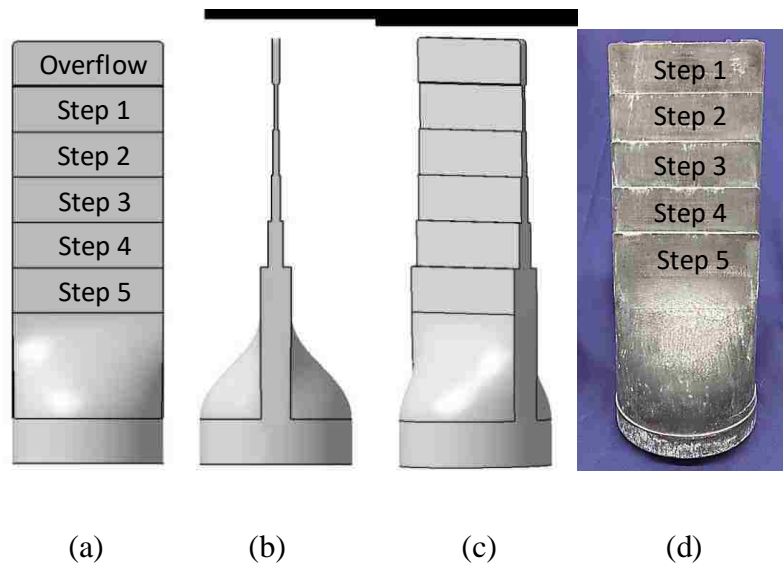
2: (a) 3-D model showing the front view, (b) side view and (c) isometric view of the 5-step casting. (d) 5-step casting solidifying under applied pressure of 60 MPa.
